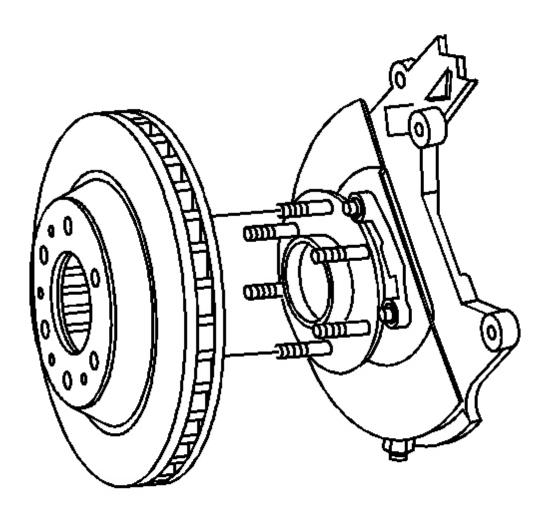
Brake Rotor Removed From Hub Courtesy of GENERAL MOTORS CORP.
